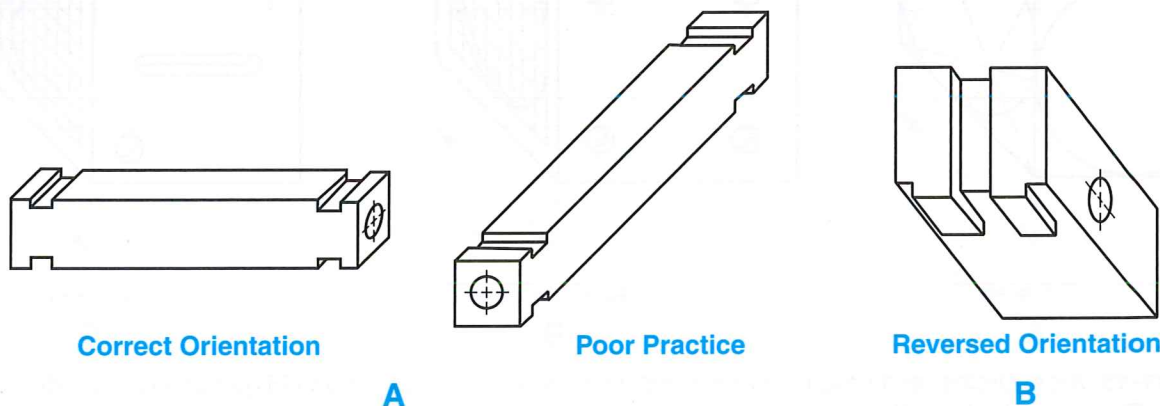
Orienting oblique drawings to show features correctly. A—Elongated objects should be located so that the long side is parallel to the viewing plane. This will minimize distortion. B—Occasionally, the bottom of an object needs to be shown. By reversing the direction of the depth axis, the bottom of the object can be shown.
